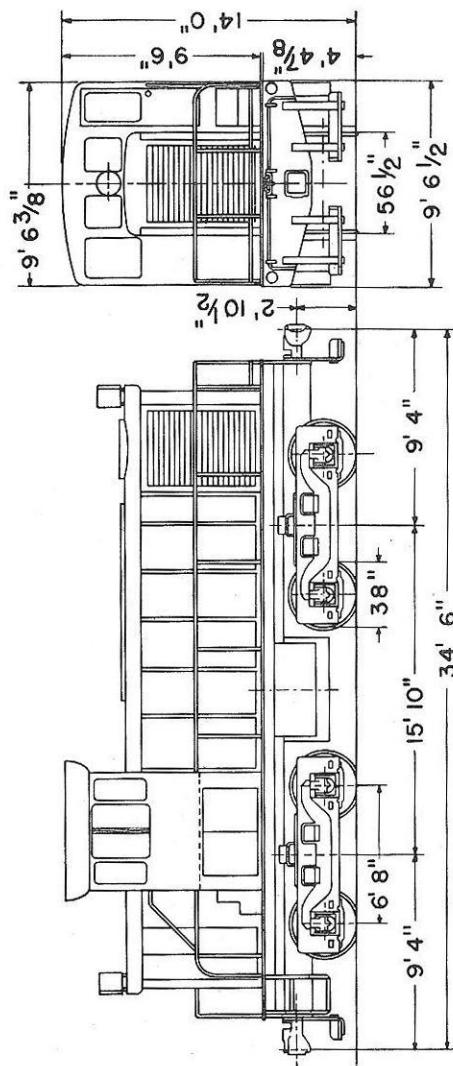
Principal dimensions of Diesel-electric locomotive.
